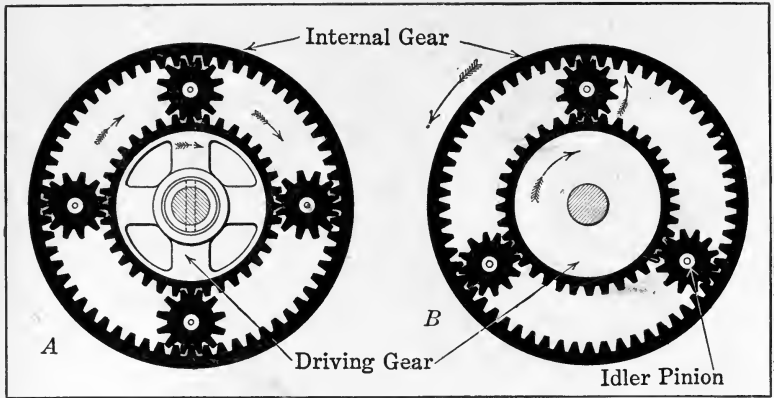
Demonstrating Action of Epicyclic Gearing. A—The Slow-Speed Gear Assembly. B—Gears and Pinions Used for Reverse Drive.
